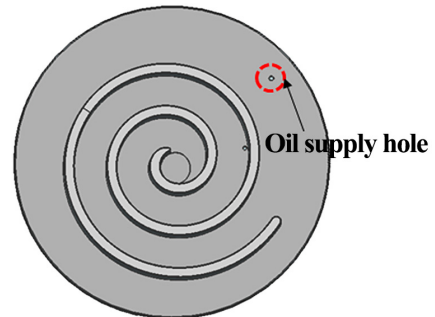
Oil supply hole on orbiting scroll baseplate.
